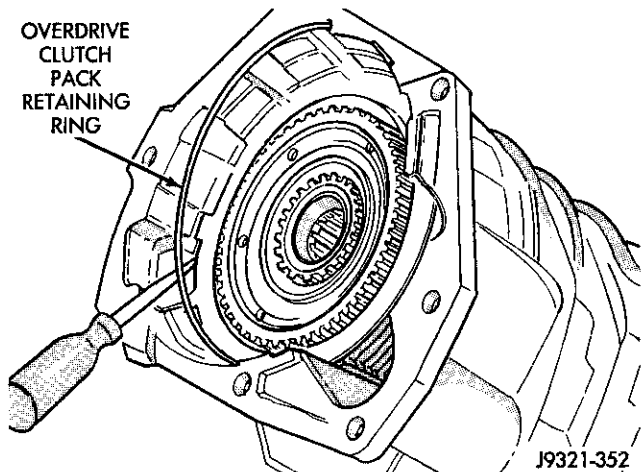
Overdrive Clutch Pack Retaining Ring Installation
